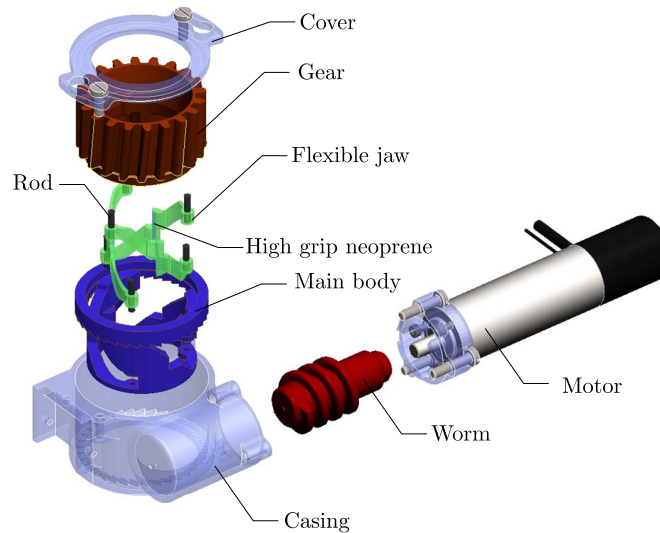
Exploded CAD view of the flexible NGD with the servo actuator.
